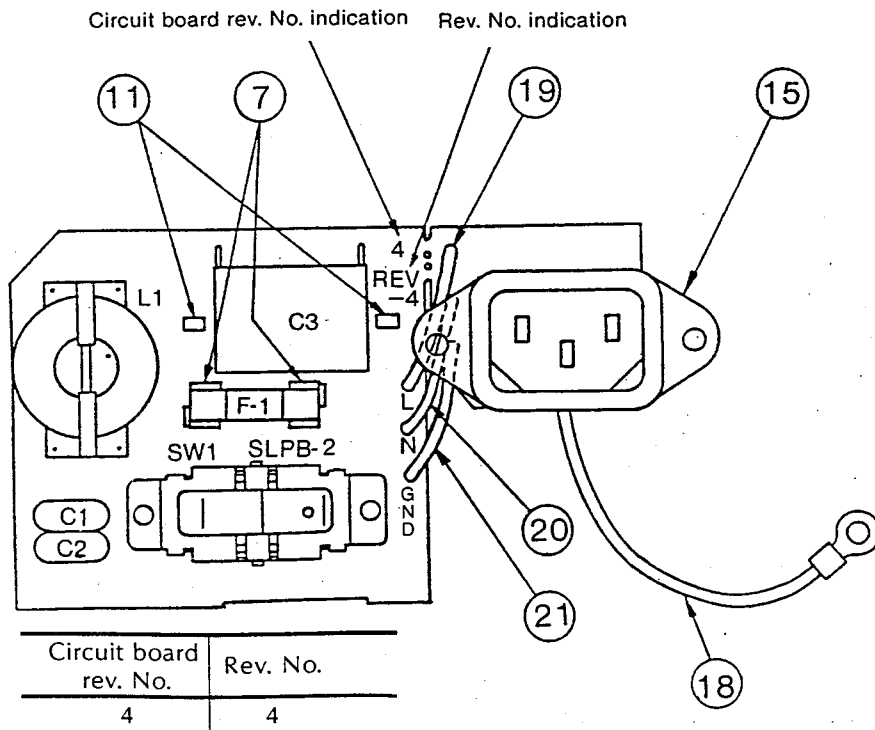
SLSQ Printed-Circuit Board (4YA4021-1007G1)
